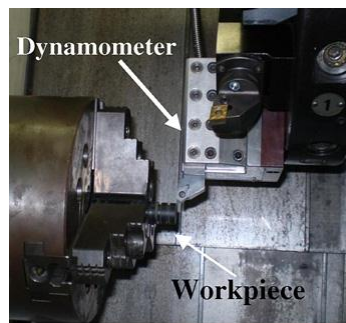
Precision turning machine for machining flexible Polyamide composites
